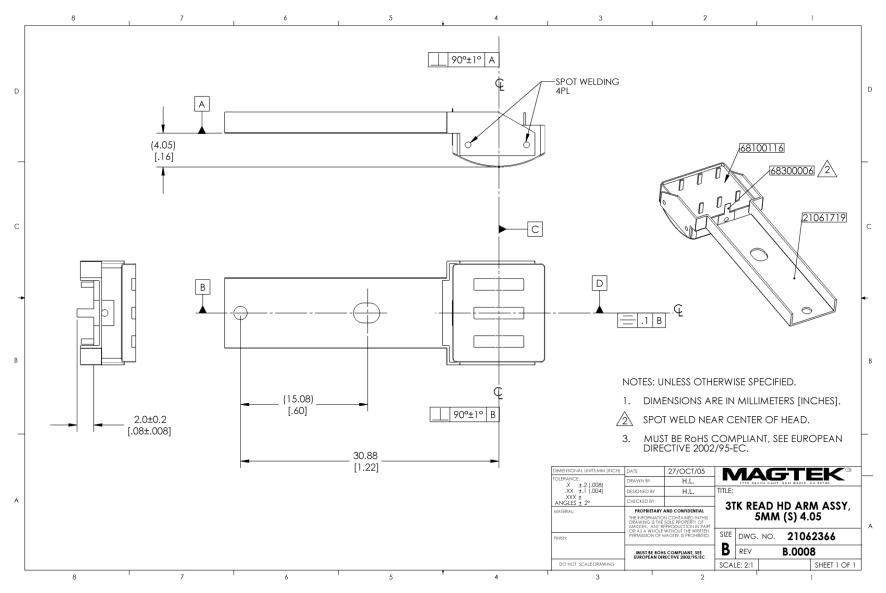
3-Track Read Head on Low Profile Beam Arm
